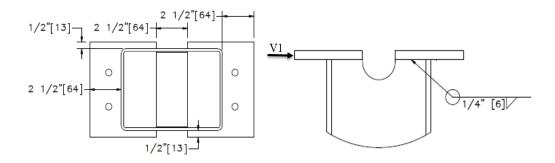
Weld Size of the Bottom Base Plate
